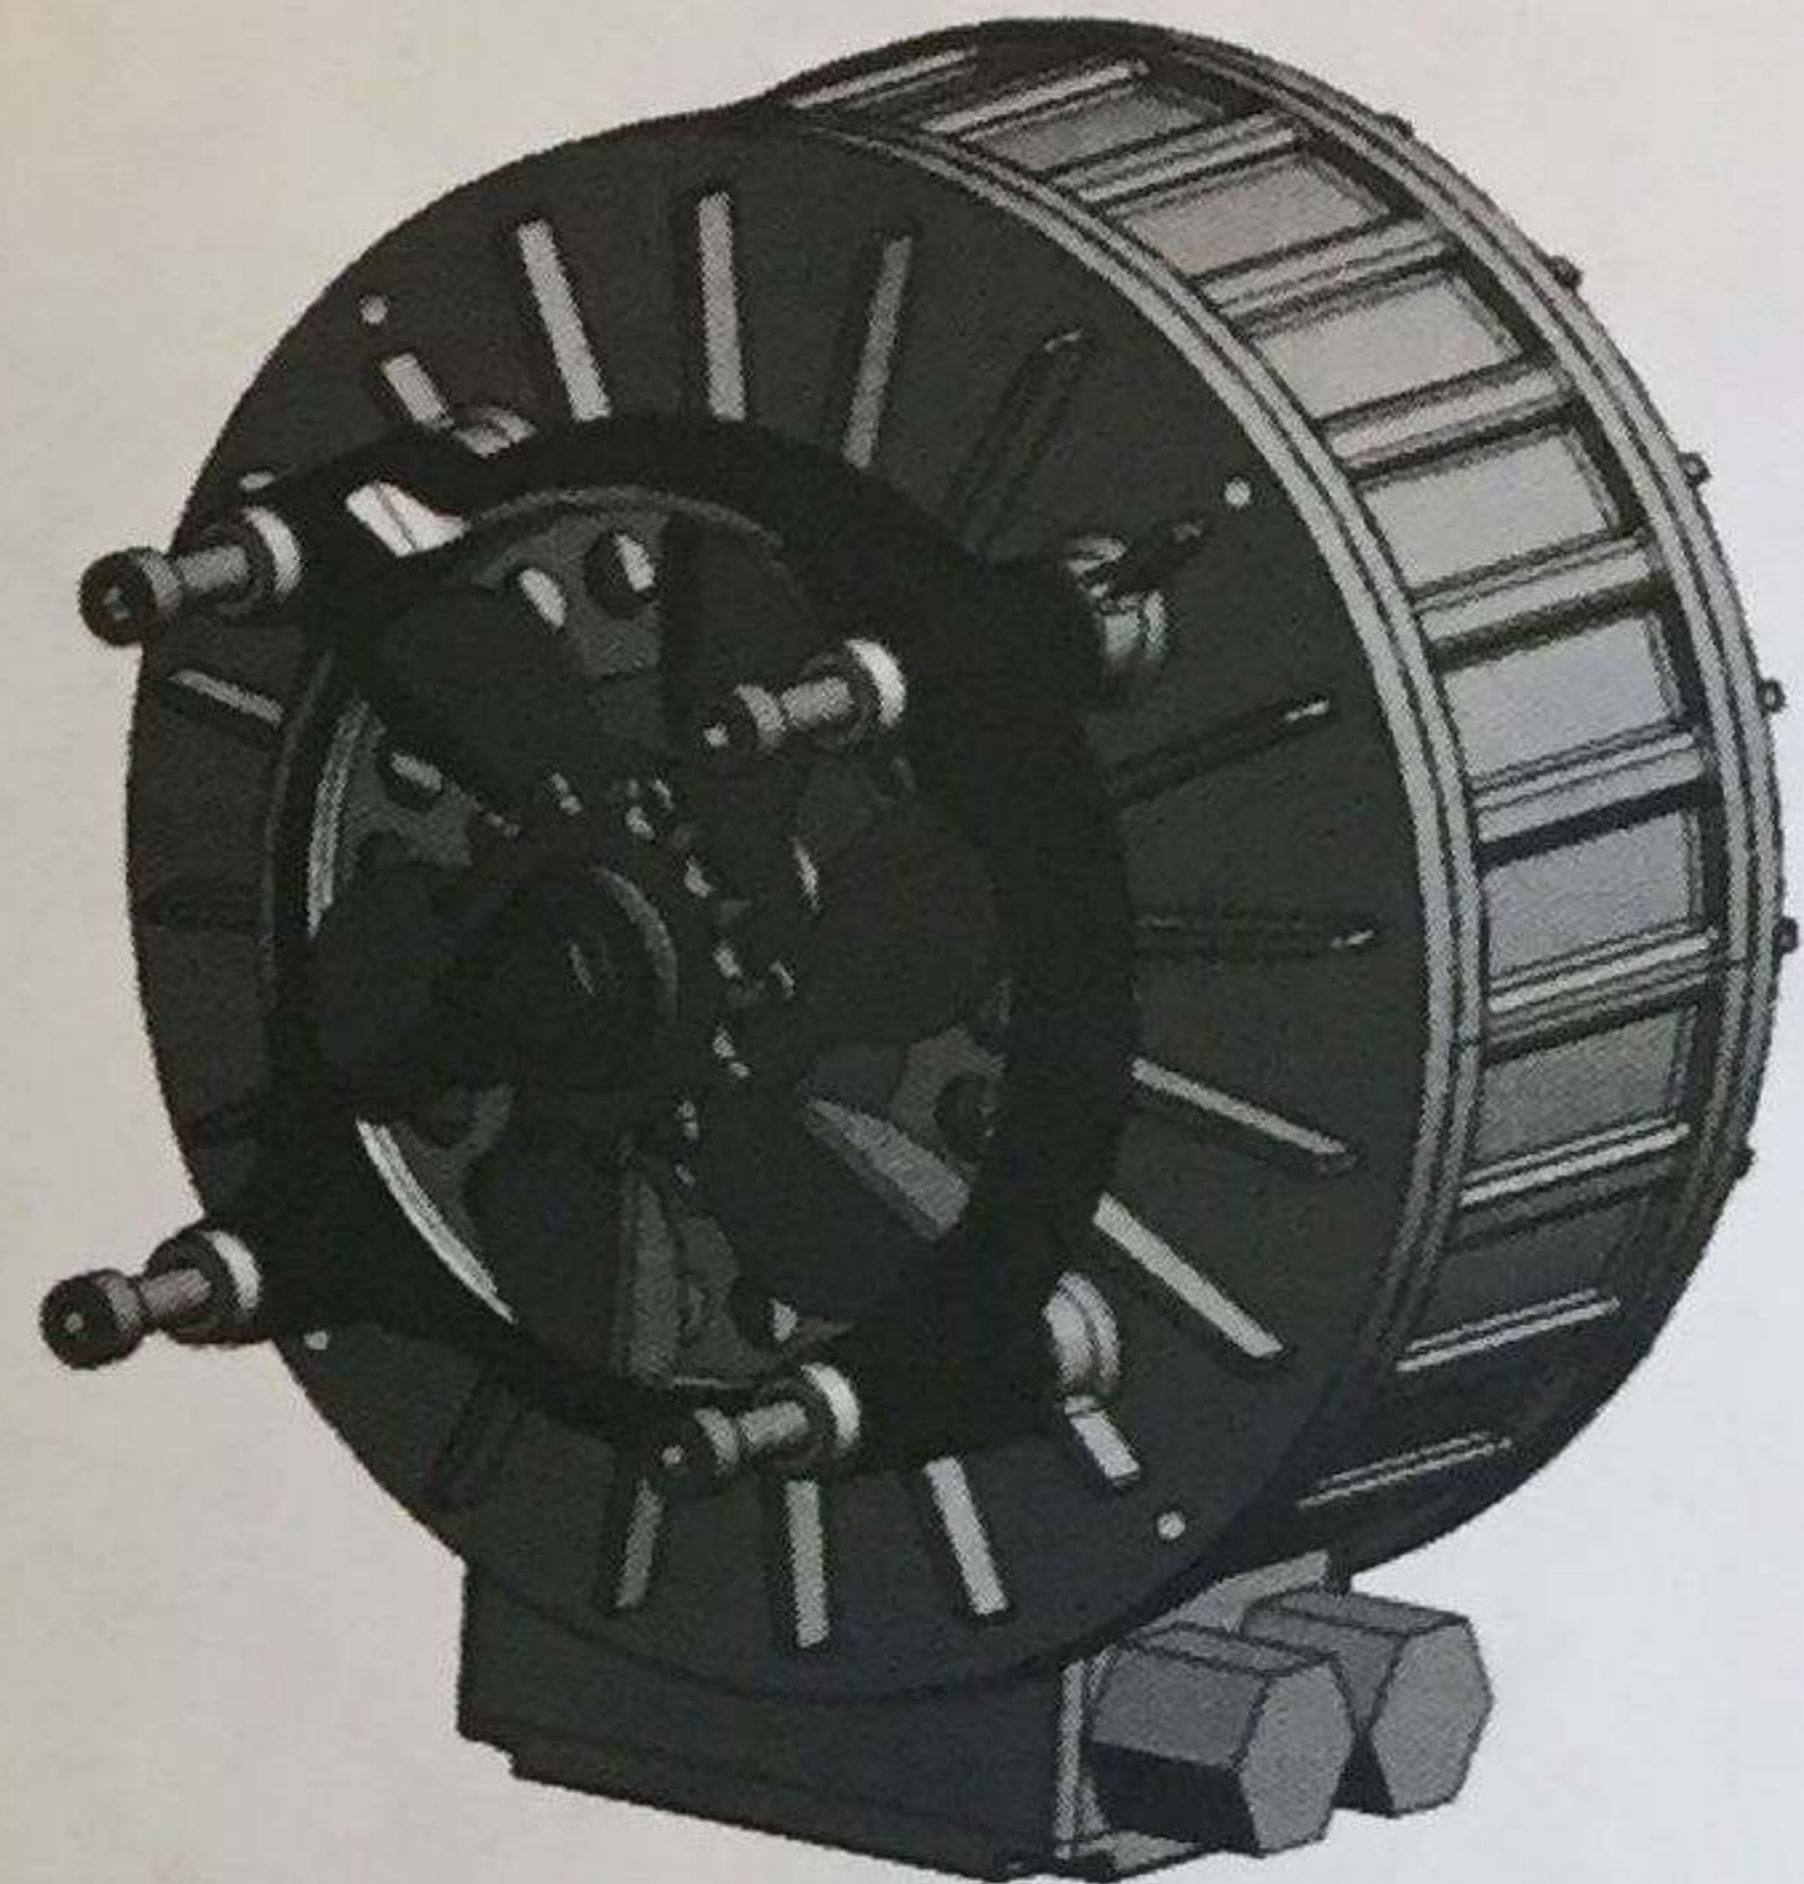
Motor, also shown are the motor mount, fan and clutch, and front sprocket.
